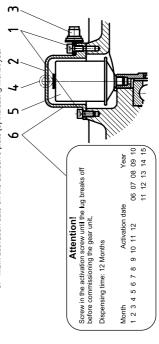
Activating the automatic lubricant dispenser with standard motor mounting
